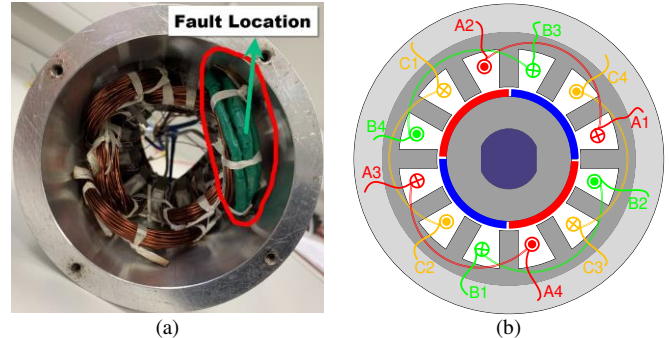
(a) Stator and (b) Winding layout of the 12-slot 4-pole SPM machine with ITSC fault.
